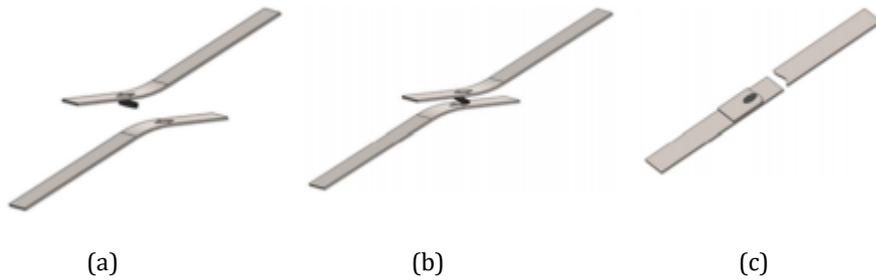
Fatigue failure modes (a) Pull out failure (b) plug failure (c) Interfacial failure [25]
